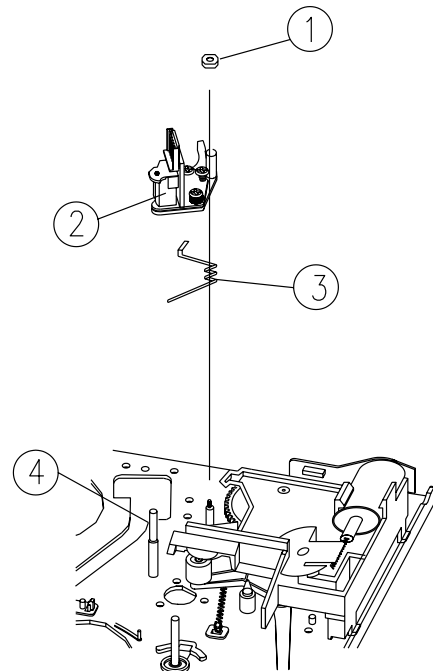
DISASSEMBLY OF THE AC HEAD ASS'Y
